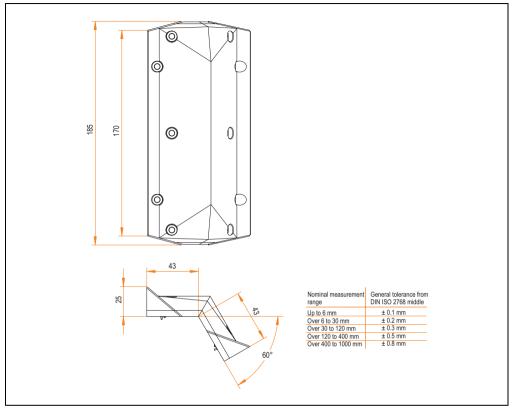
Dimensions - extension connector 60° 5AC800.CON2-00
